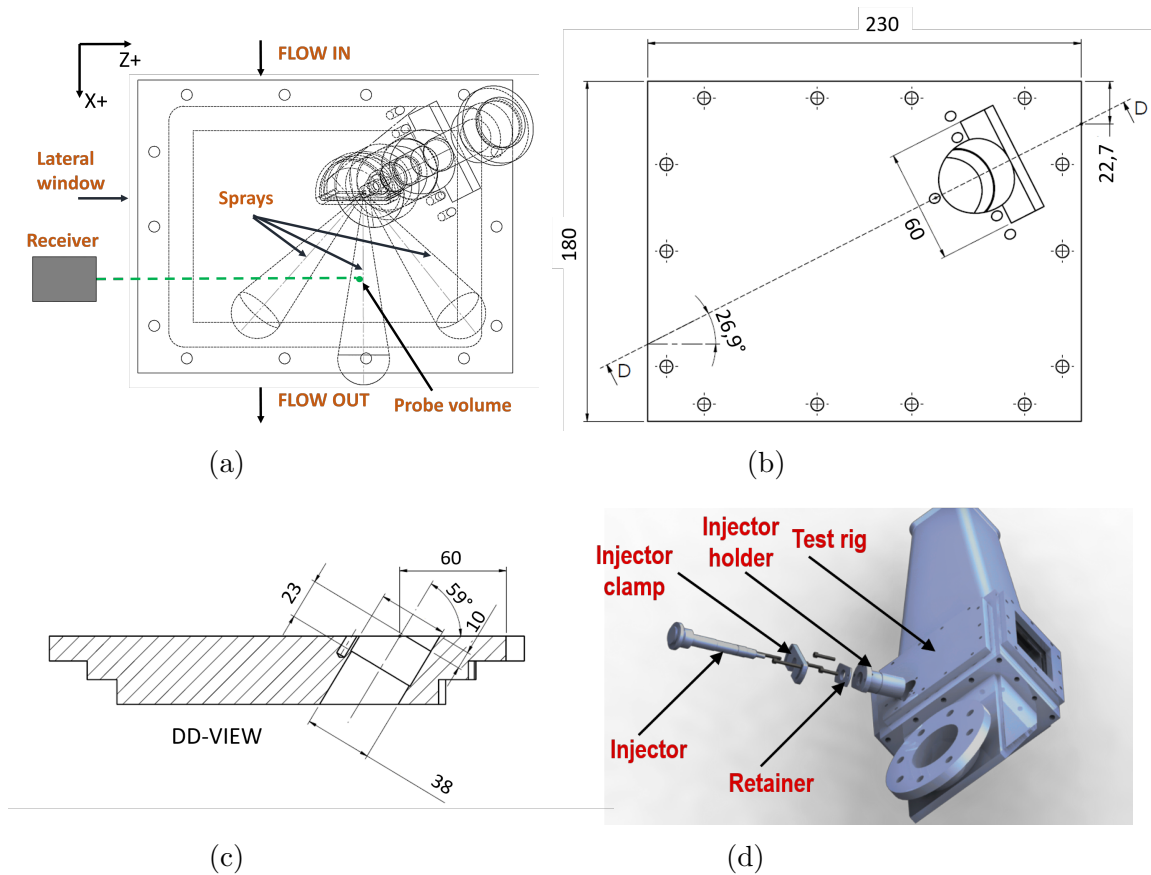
Designed bottom cover of the test rig. (a) Bottom cover of the test rig assembled with the injector (b) Bottom cover dimensions (c) Bottom cover dimensions, D-D View (d) Test rig assemble with the injector.
